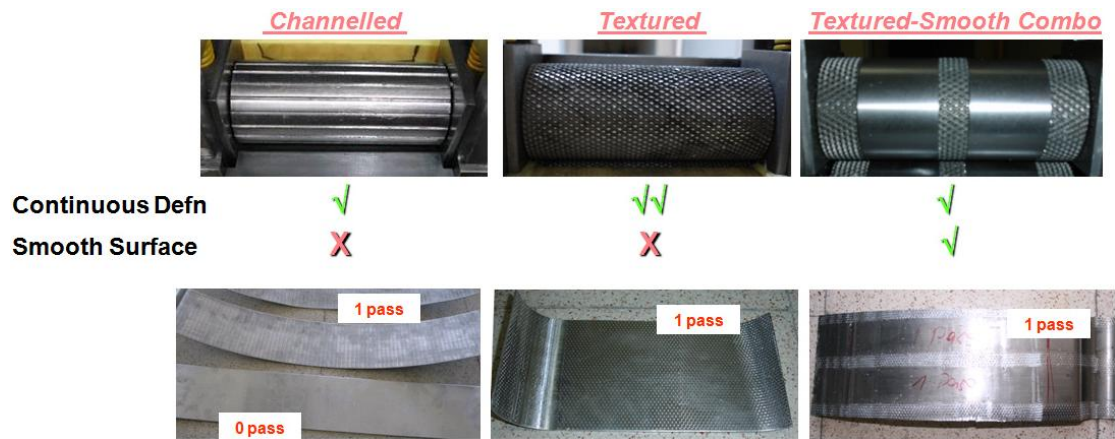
Manufacturing stages (a) channeled roller (b) patterned roller (c) semi-patterned roller
